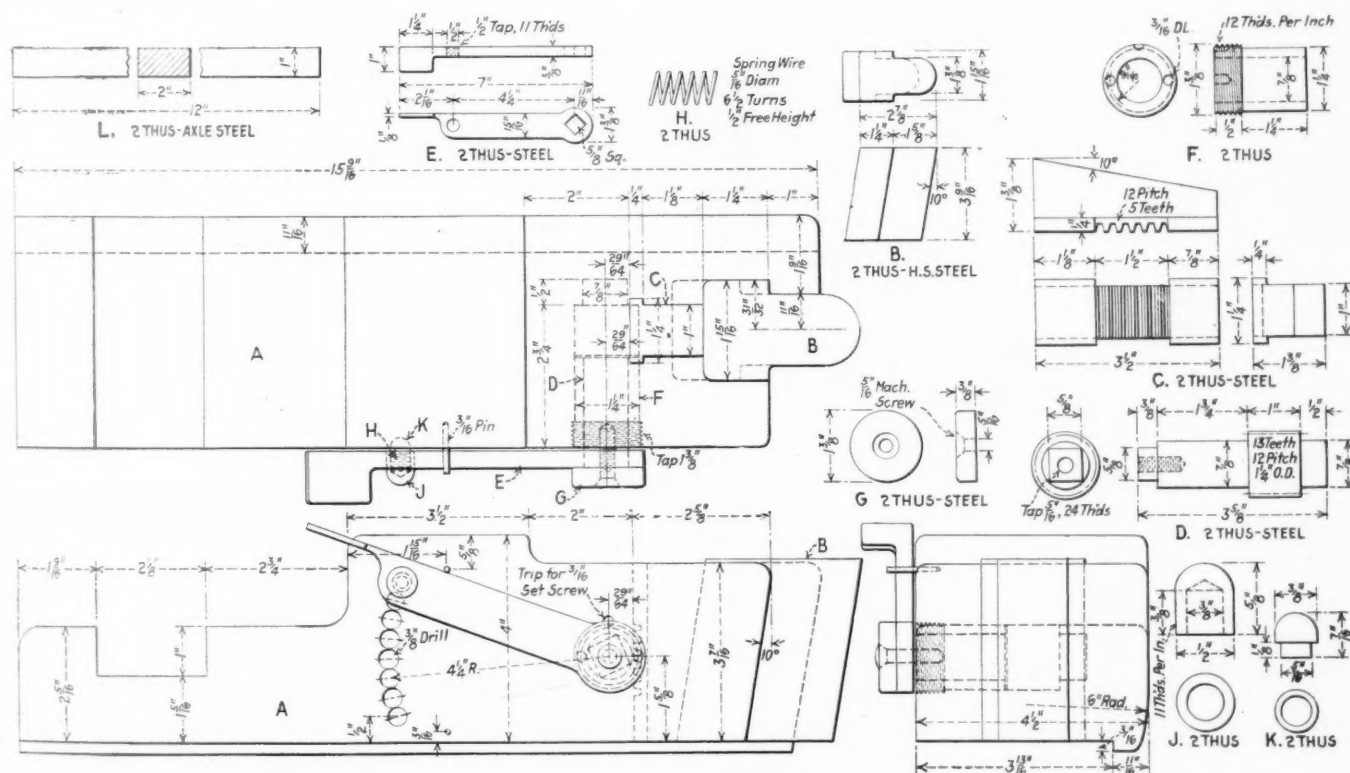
General Arrangement and Details of Left-Hand Wheel Lathe Roughing Tool Holder
